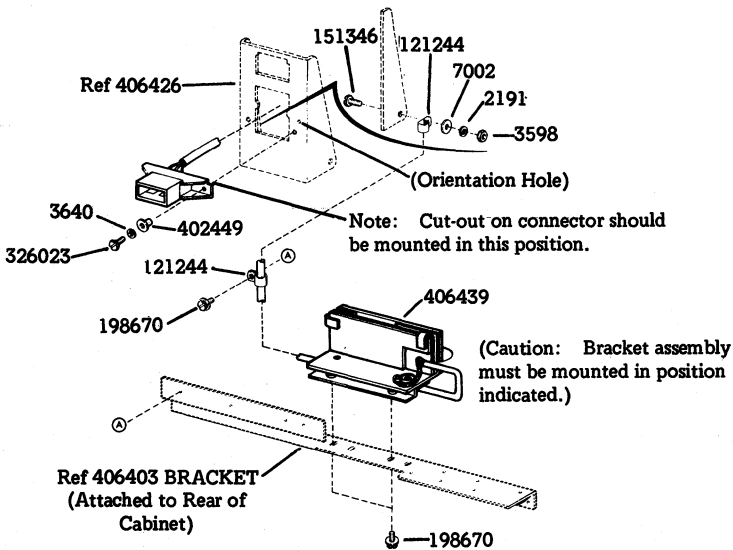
Modification Kit to Provide Mounting for Model 40 Paper Winder
